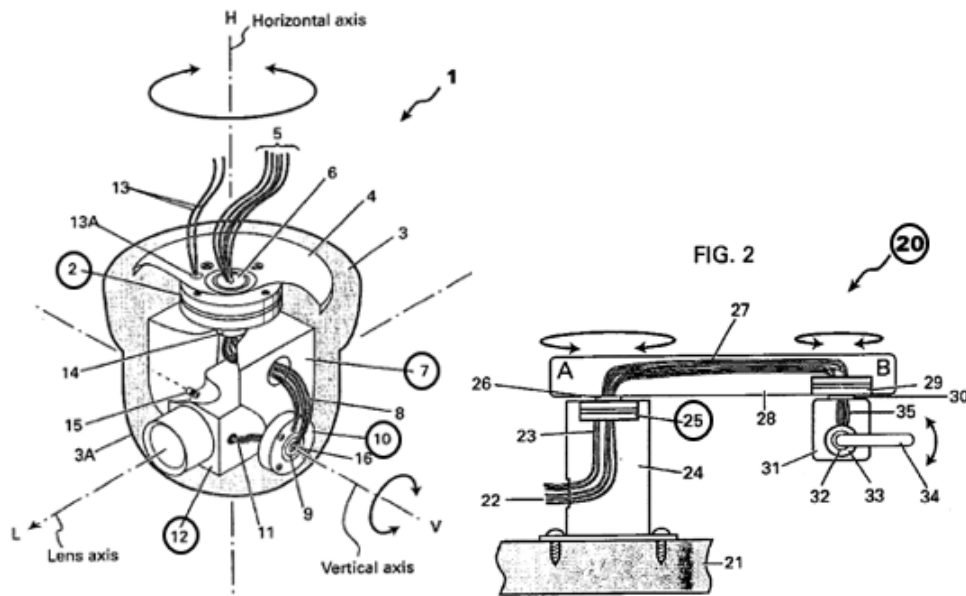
Direct drive electric motor apparatus incorporating slip ring assembly.
